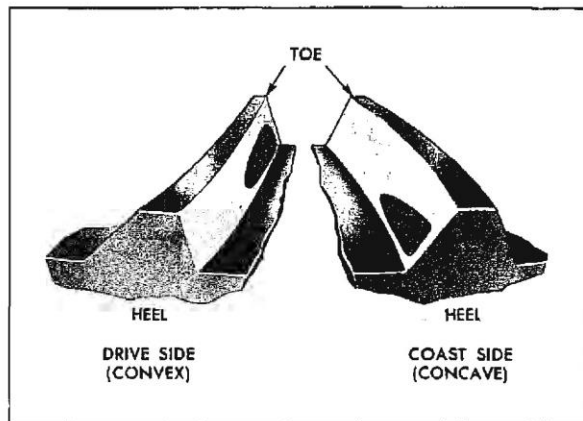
Tooth Pattern - Pinion too Close to Ring Gear (Shim Pack Thickness Excessive)
